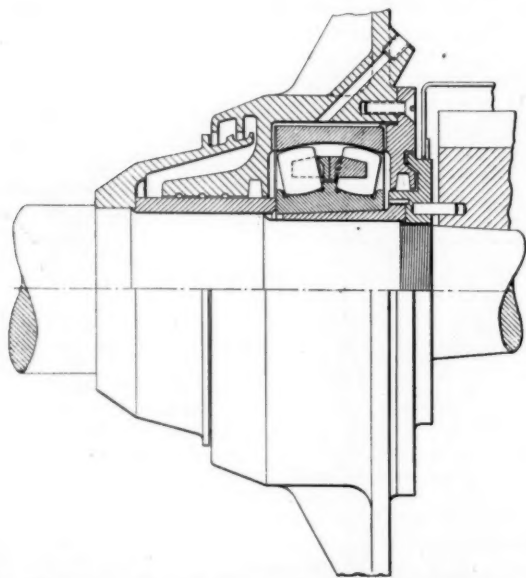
Spherical Roller Bearing Applied to Motor Armature Shaft
